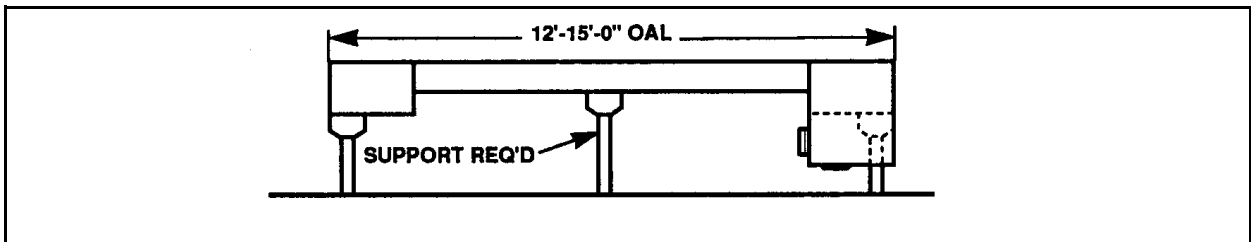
12'-15'-0" OAL Shipped Fully-Assembled Attach Three Supports
